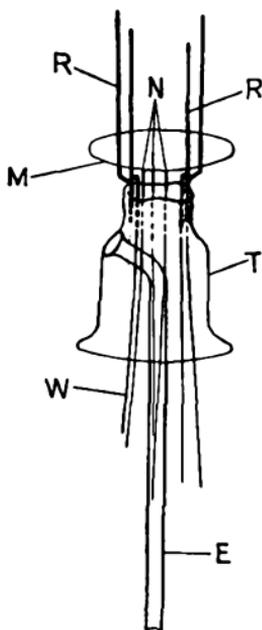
Method of bending and connecting supporting posts to wires connected to common terminals.
